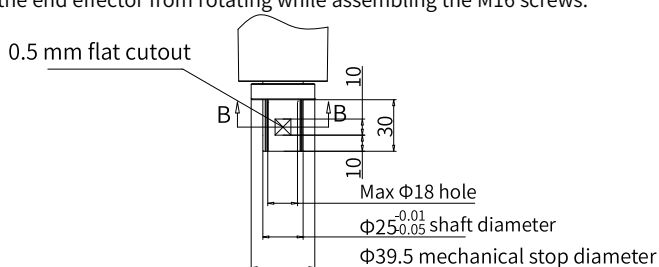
Installation position of auxiliary tooling for IR-S20
